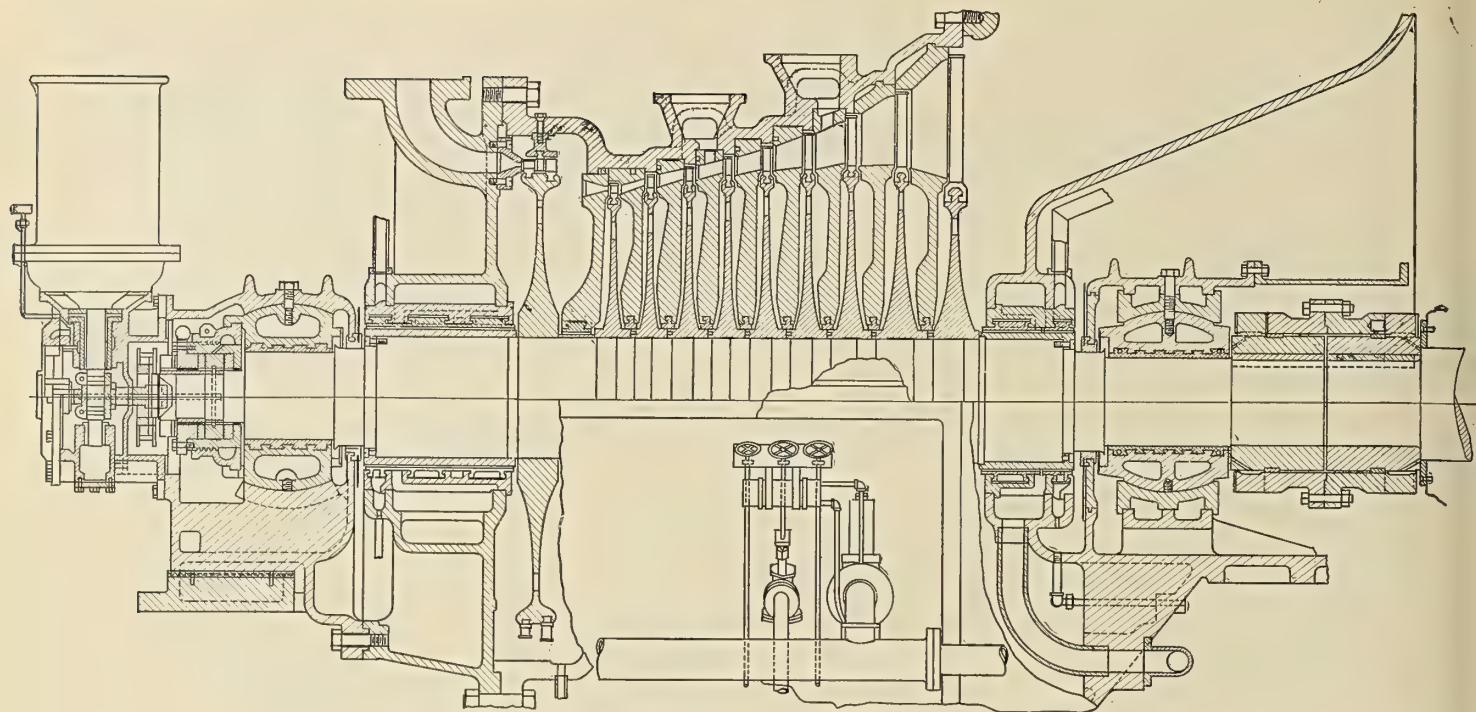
Assembly Cross Section of 10-Stage Horizontal Steam Turbine
